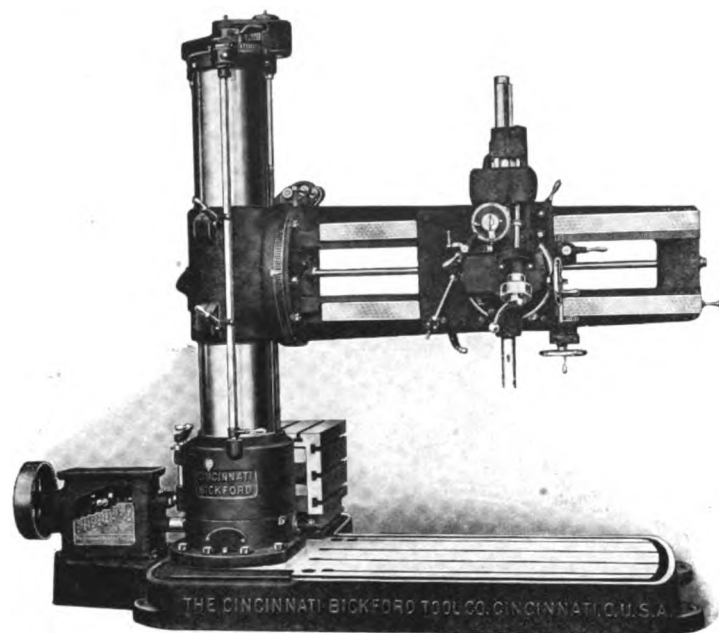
4, 5 and 6-Foot Full Universal Radial
